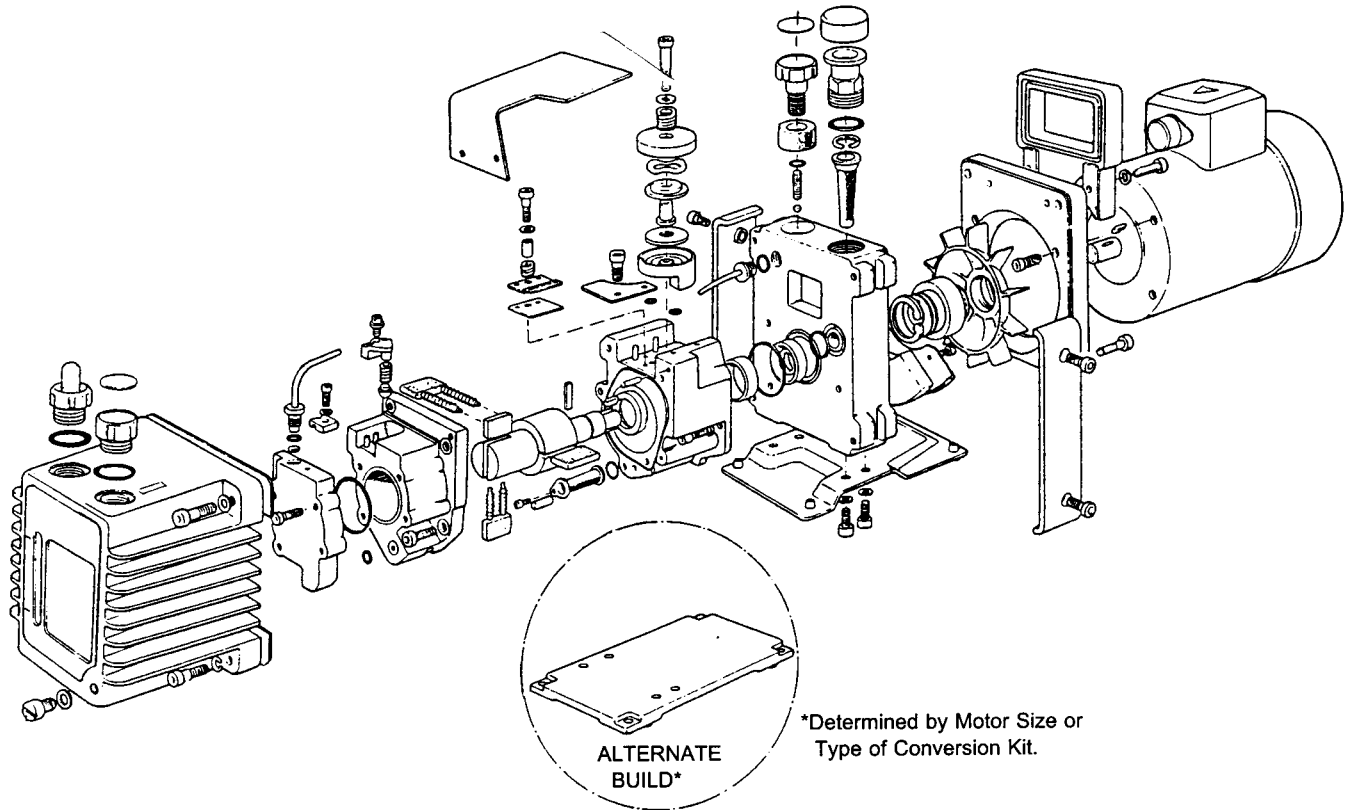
EXPLODED VIEW - E1M5 PUMP
